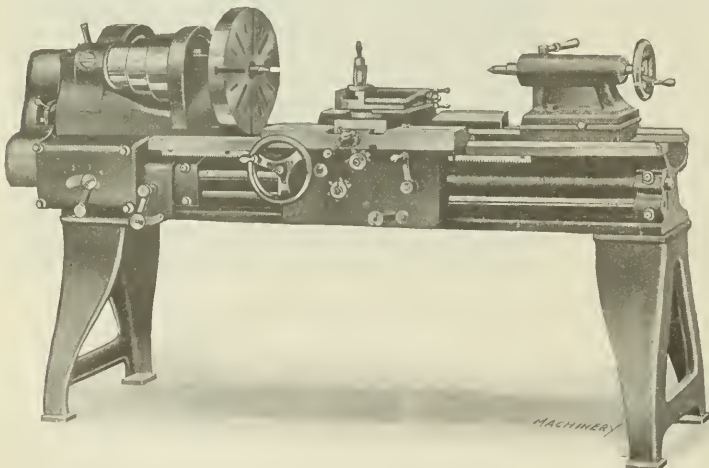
Universal Machinery Co.'s 16-inch Engine Lathe with Semi-quick-change Gear
